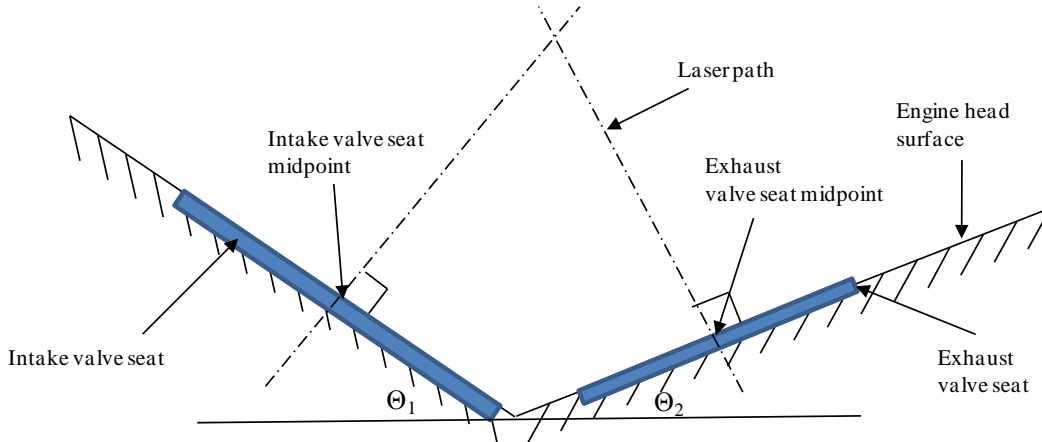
Laser hits both the intake and exhaust valve seat midpoints at 90 deg from the valve seat plane.
